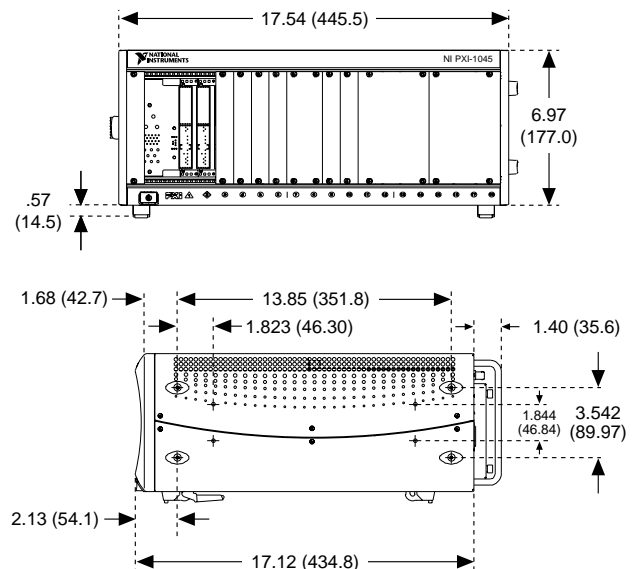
PXI-1045 Front and Side Dimensions in Inches (mm)
